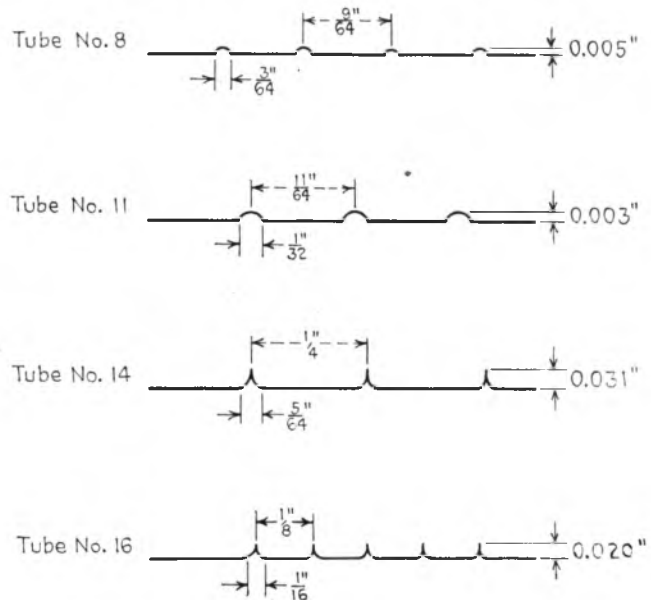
(a) DIMENSIONS OF CORRUGATIONS ON INSIDE OF TYPICAL TUBES
